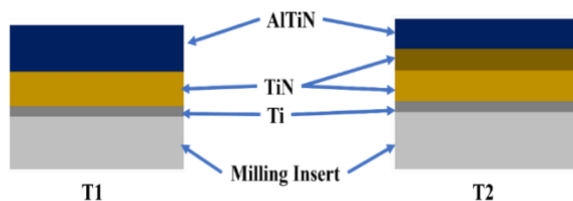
Deposition layer on cutting tool insert by hybrid PVD process
